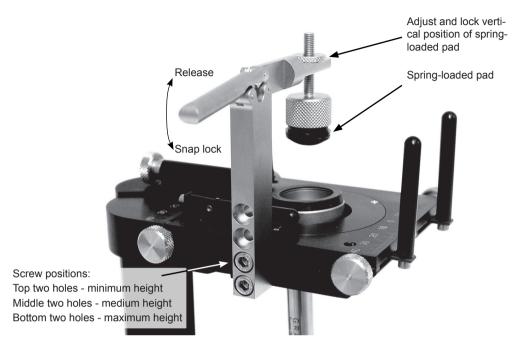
Clamping arrangement using the Snap Clamp GU0133
